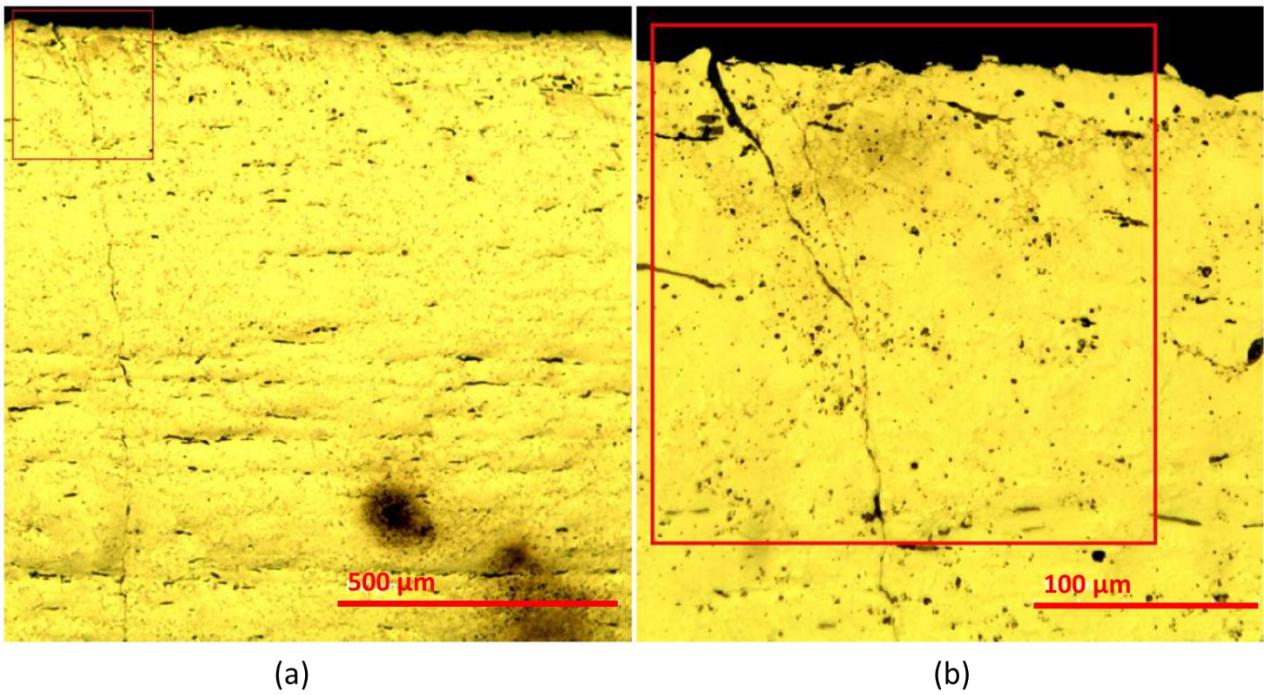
Sectional view (shaft longitudinal section) of a crack on shaft S24: (a) lower magnification and (b) higher magnification
